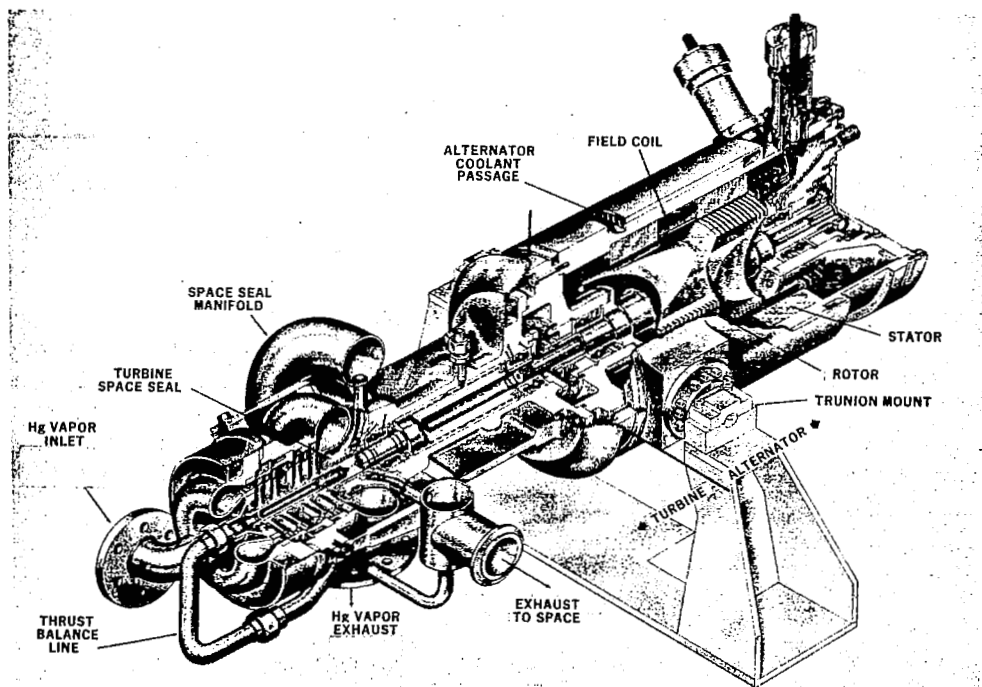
Mark 66 Turbine-Alternator Cutaway View
